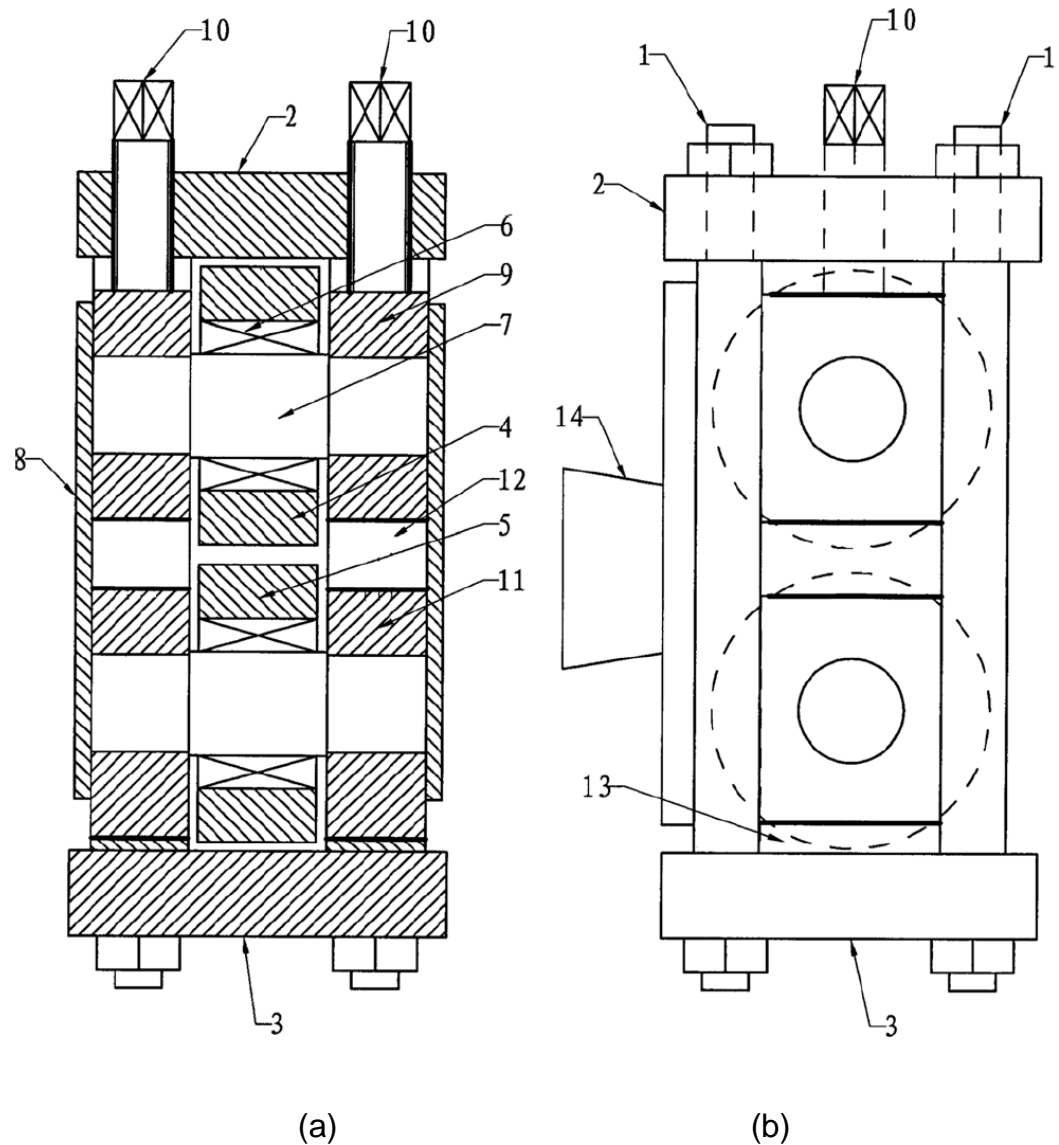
Overall view of the LST-mill. (a) Cross-sectional view; (b) Left view of the mill in Figure 2.2 (a).
